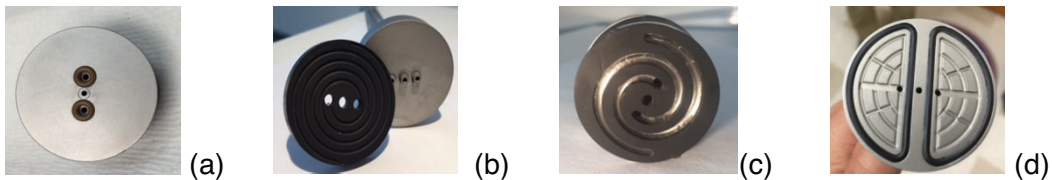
Examples of new elastomer based inlet end-piece designs, (a) O-ring, (b) Elastomer spiral, (c) Spiral with gasket, and (d) Half-moons
